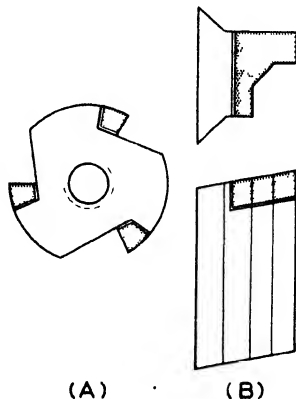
Sandwiched Braze Circular and Dovetail Forming Tools
